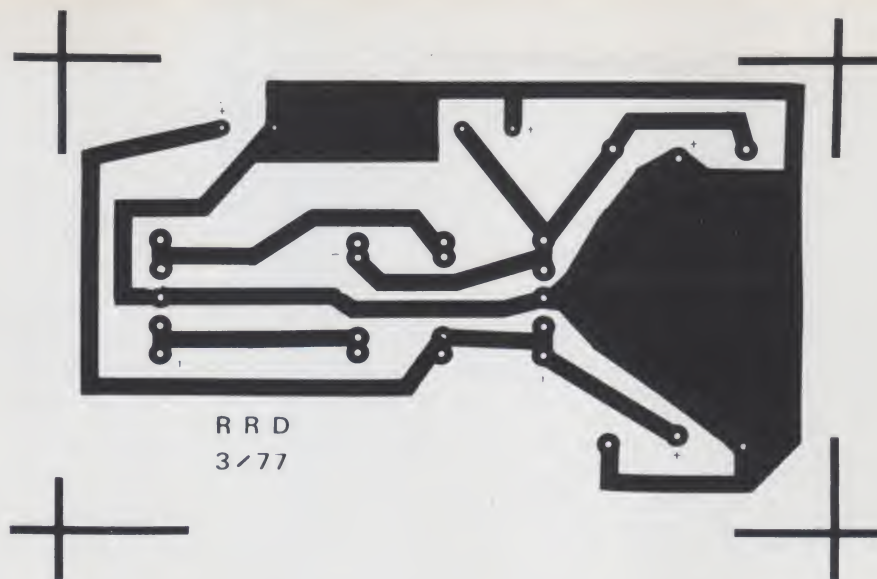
Full-size printed circuit foil pattern for the rectifier-filter PC board.
